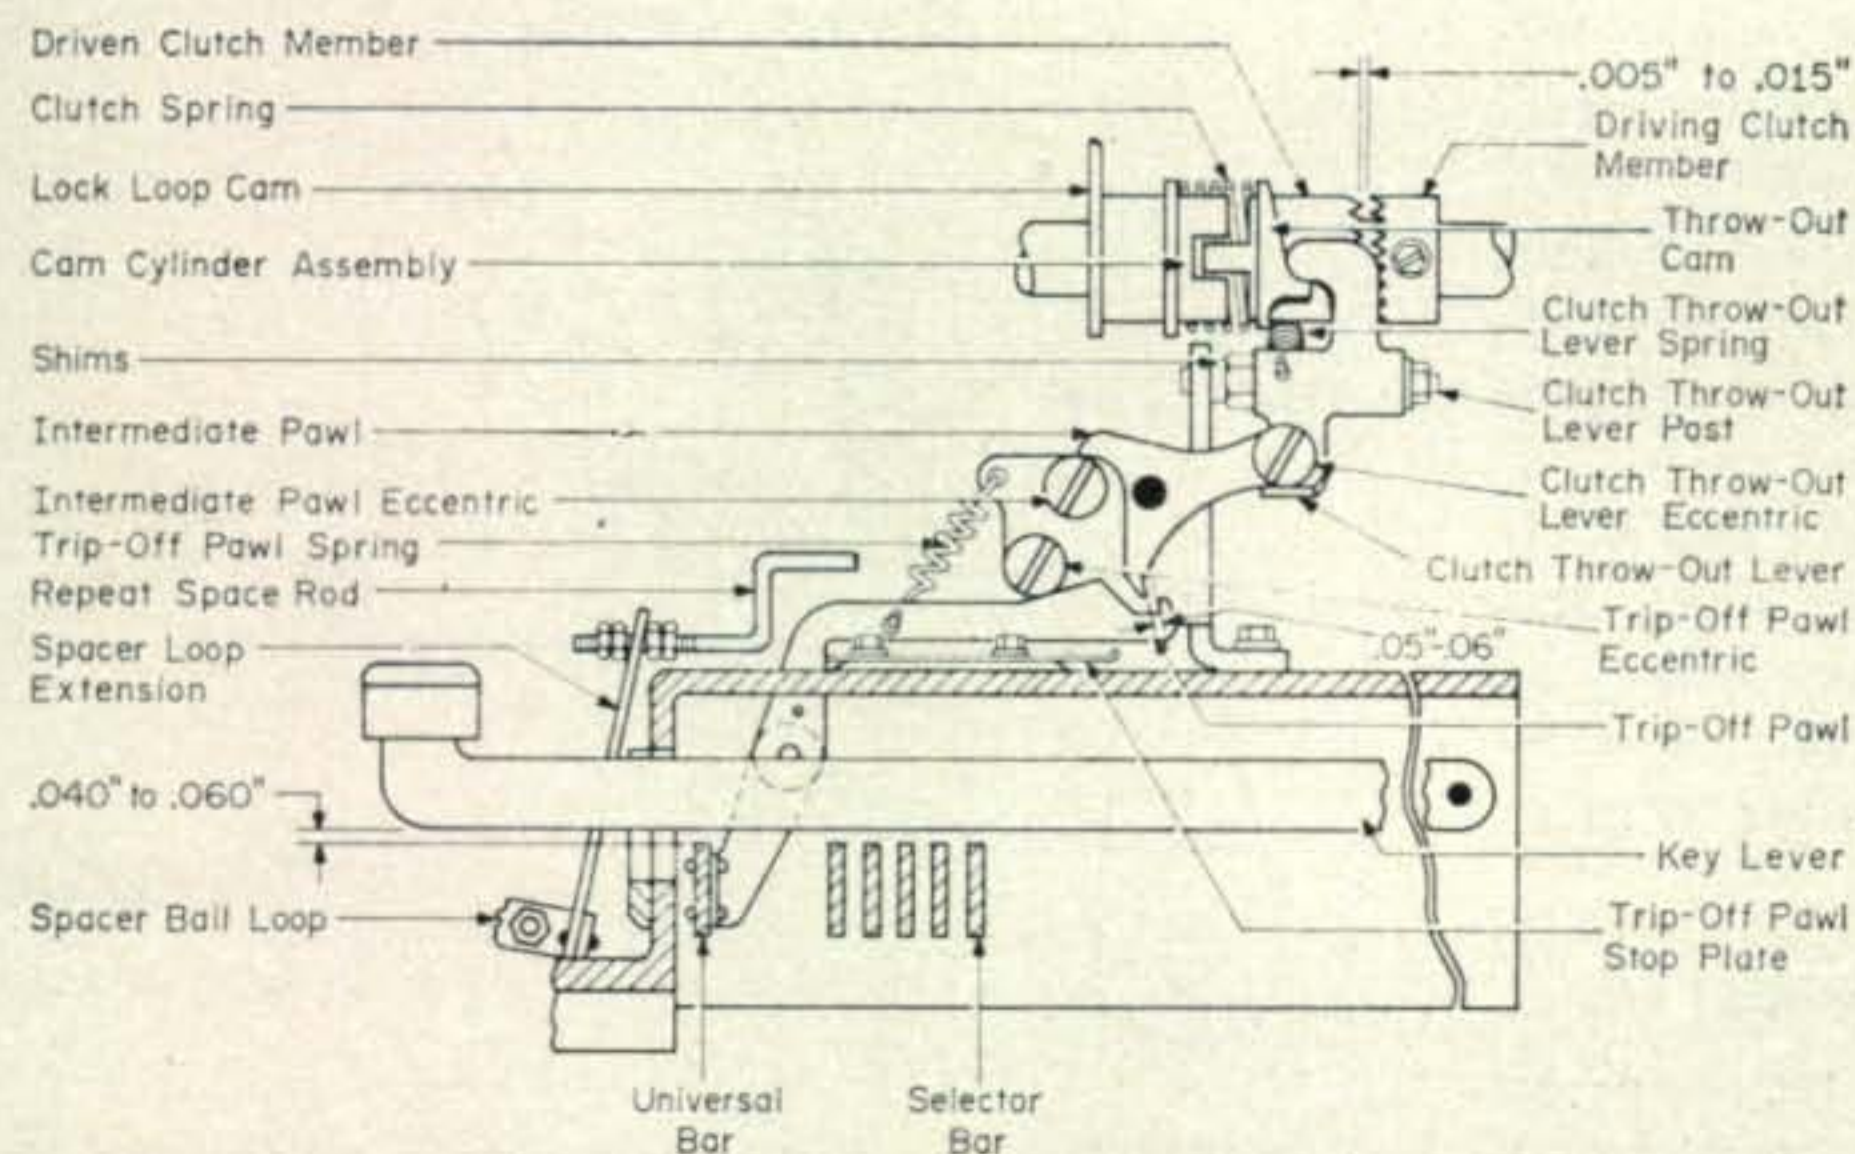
Line drawing of a cross-section of a portion of the teletypewriter keyboard showing the clutch release mechanism and other parts associated with the transmitter. Various spacing adjustments are also shown.
